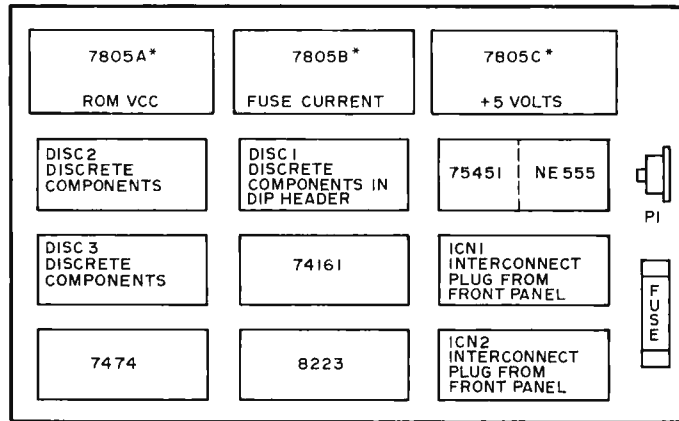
Wire wrap board layout. *Mounted on heatsinks.
